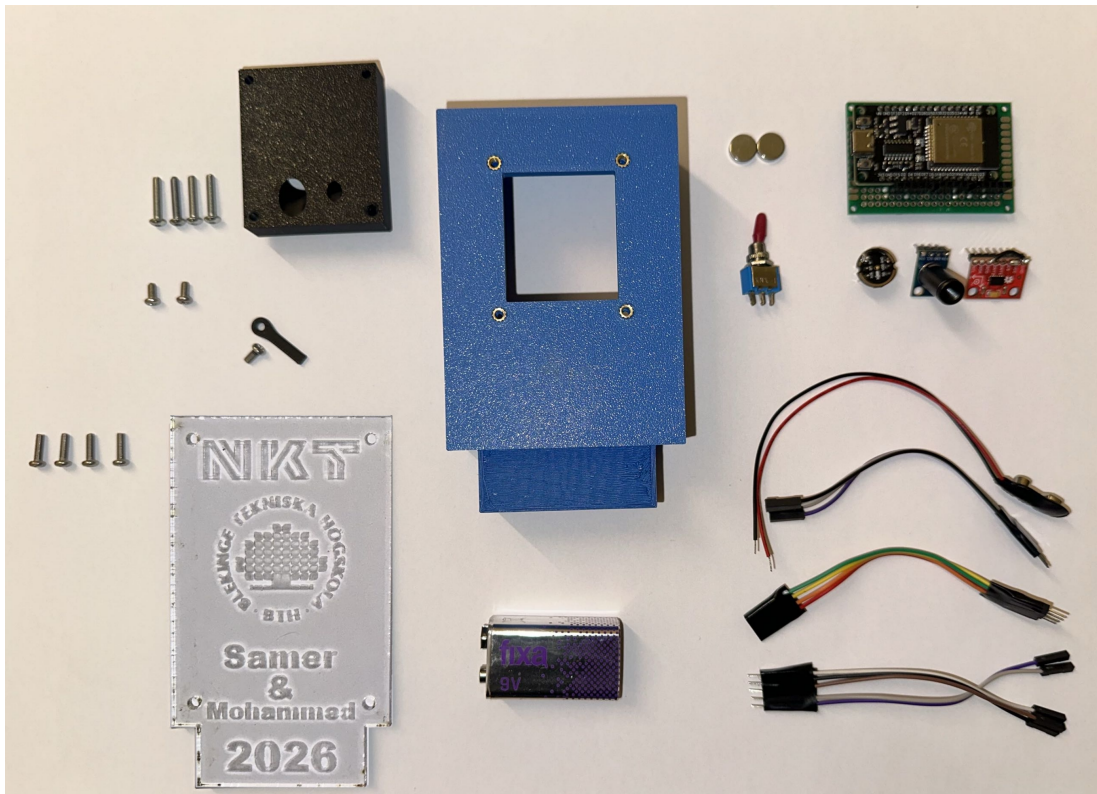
Exploded view of the NKT-Tool hardware components.
